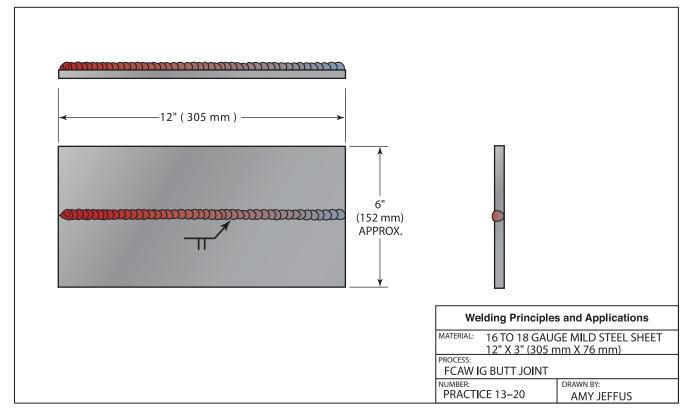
FCAW 1G butt joint, 16- to 18-gauge mild steel.
